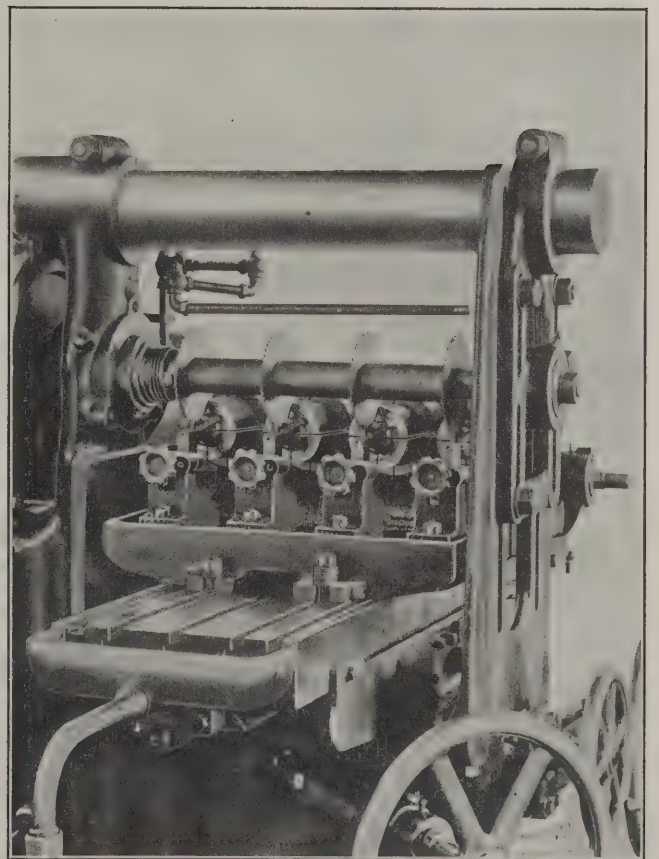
Slitting Conical Holders used in Turret Lathe Chucks.
